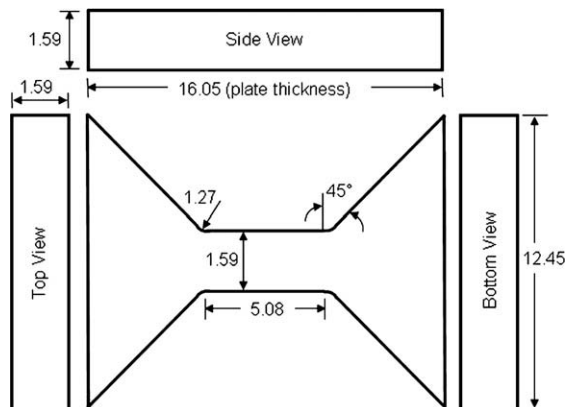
Geometry and dimensions (in mm) of the through-thickness uniaxial tensile specimen.
